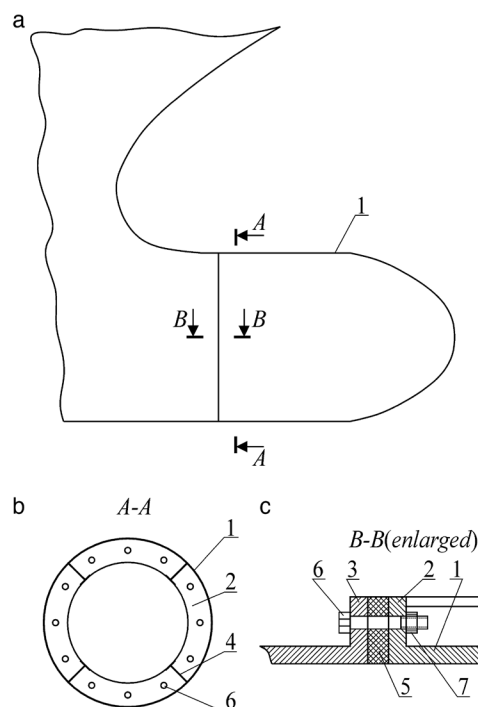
Scheme of a detachable bulb: a) general view; b) section A-A; c) section B-B; 1- casing; 2- bulb flange; 3- vessel hull flange; 4- stiffening ribs; 5- gasket; 6- explosive bolts; 7- nuts
